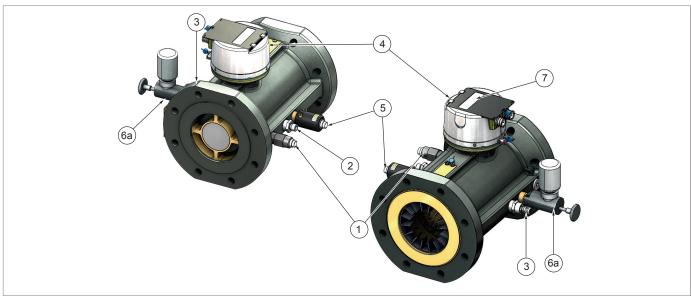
Positioning fittings and meter accessories iM-TM aluminium body
